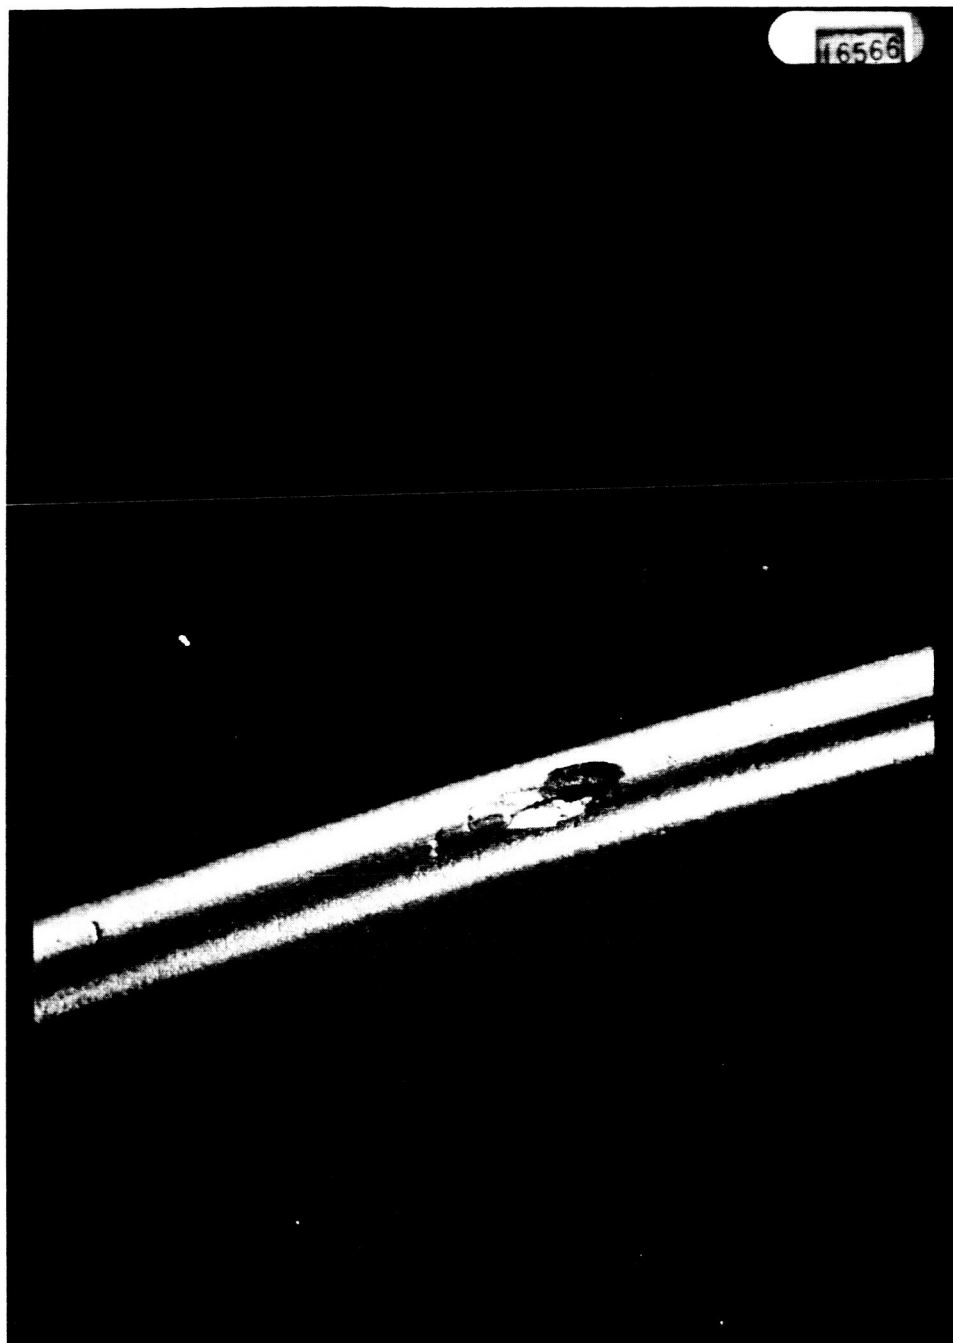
Surface defect in 2319 weld wire. 17K
